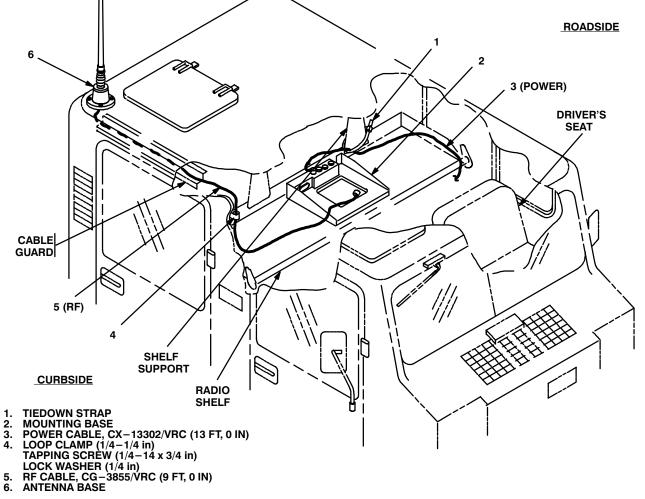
(1). Cable Installation: RF and Power Cabling
